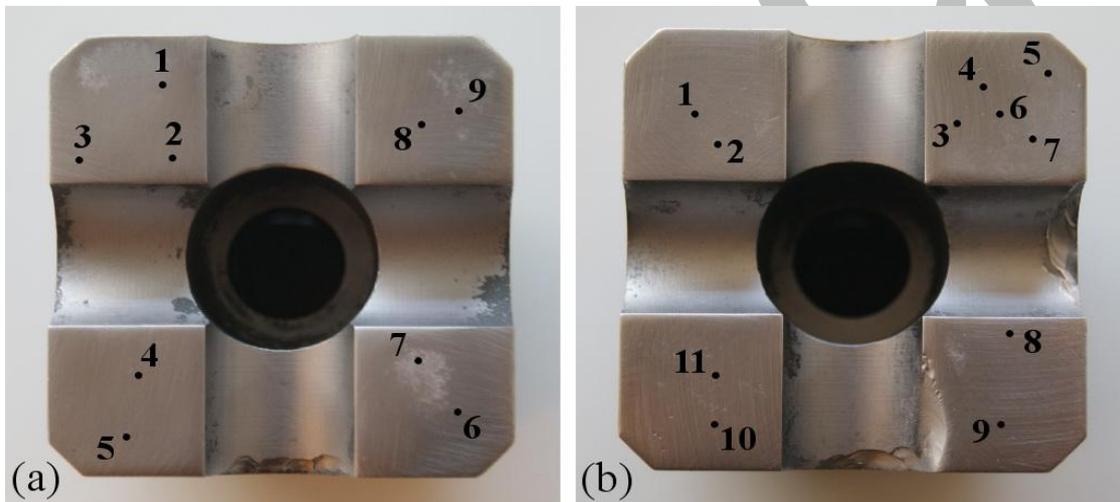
Hardness measurements points on the working surface; (a) Piece I, (b) Piece II.
